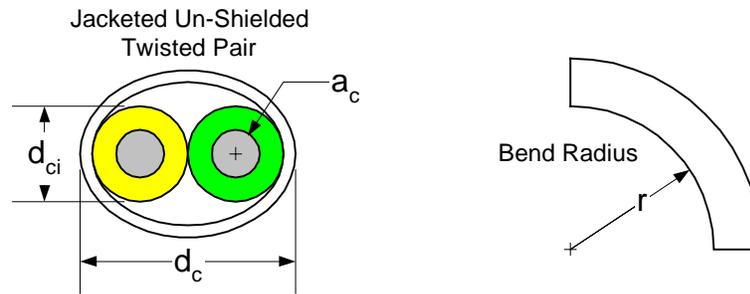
CABLE CROSS-SECTION AND BEND RADIUS
